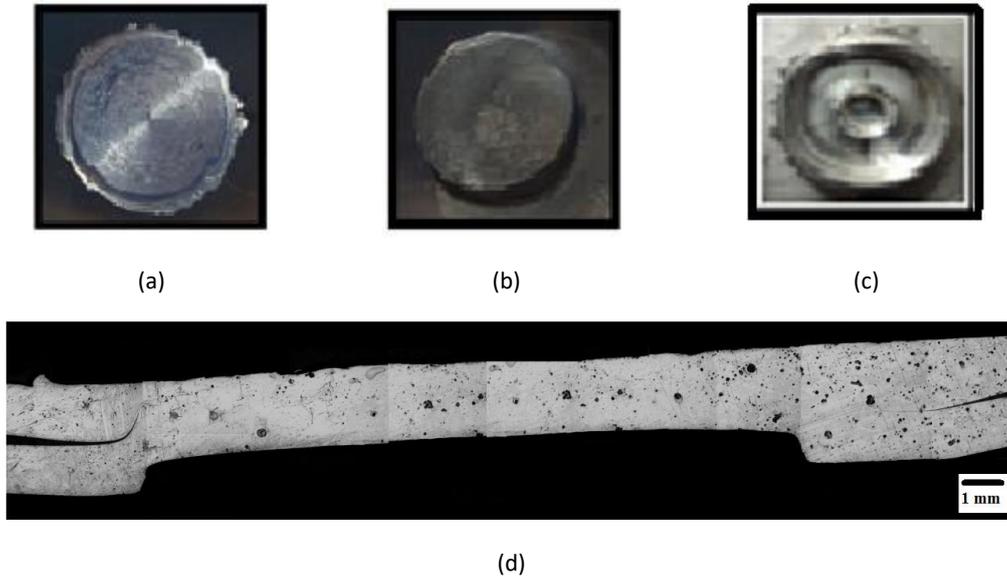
Macrograph of (a) upper surface, (b) bottom surface and (c) top surface of FSSW for ref[31]. (d) cross section of PFSSW
